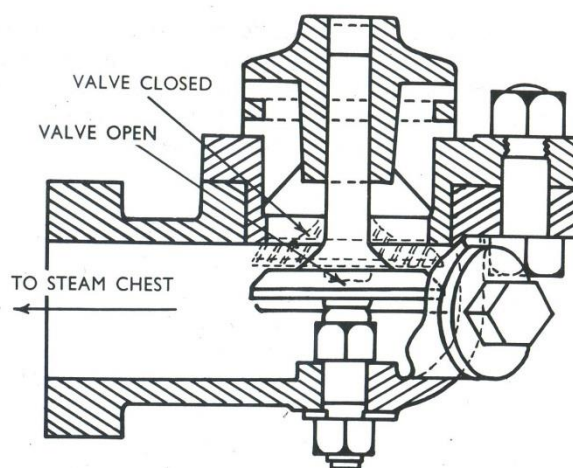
ANTI-VACUUM VALVE MOUNTED ON STEAM CHEST
